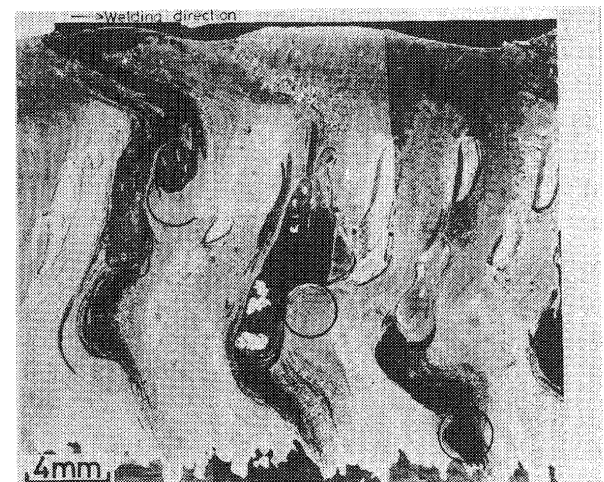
Solidification pattern of segregation region in longitudinal section of SUS304N welds. (Used aluminum brazing filler metal for insert metal)
